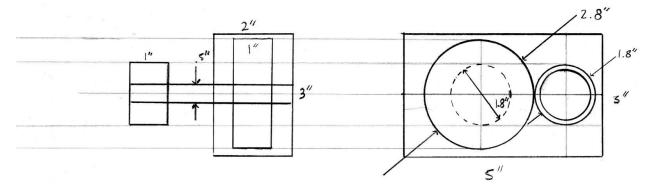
Approximate Layout and Dimensions for Hand Crank with Gears
